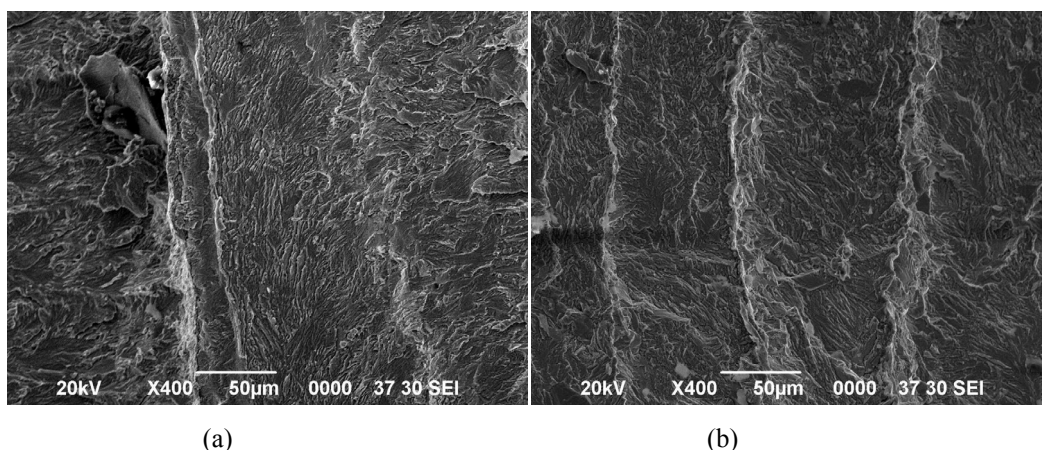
Crack propagation zone: (a) 3.0-1.0 mm joint (b) 1.0-1.0 mm joint
